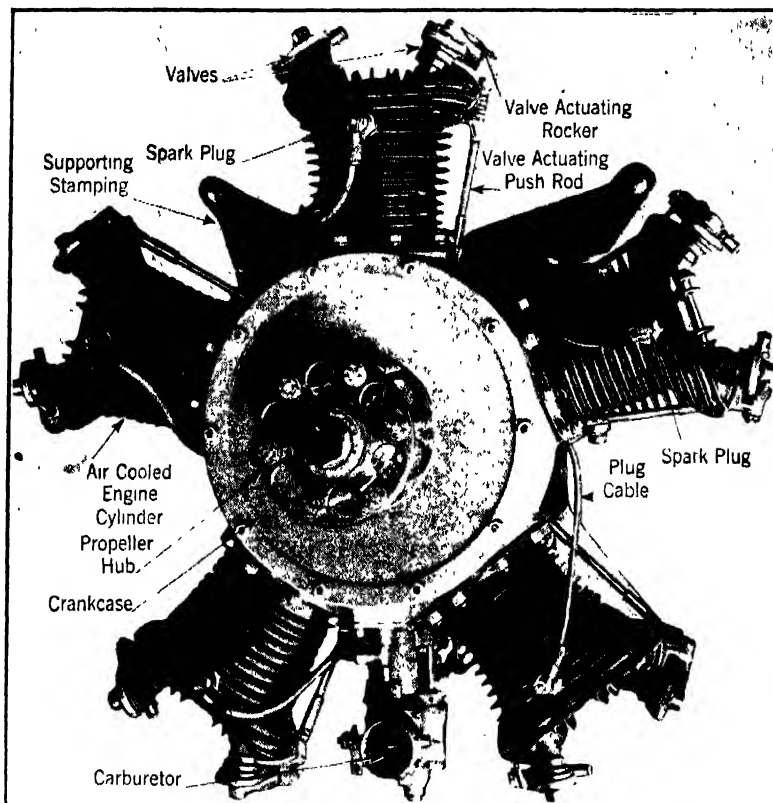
Front View of Detroit Five Cylinder Radial Air-Cooled Aviation Engine.
